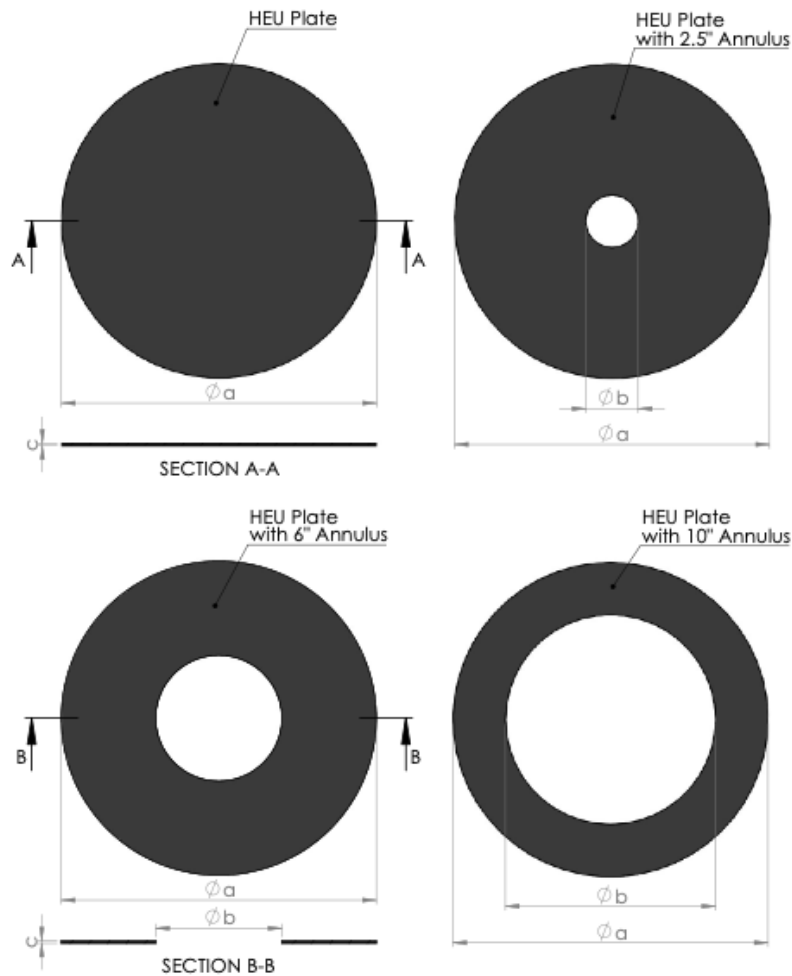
Drawings of the HEU plates, showing the 15/0-HEU (upper left), 15/2.5-HEU (upper right), 15/6-HEU (lower left), and 15/10-HEU (lower right).
